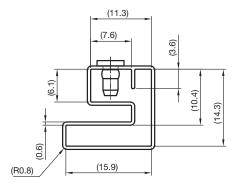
Issue: 1; 30.04.10 22129
